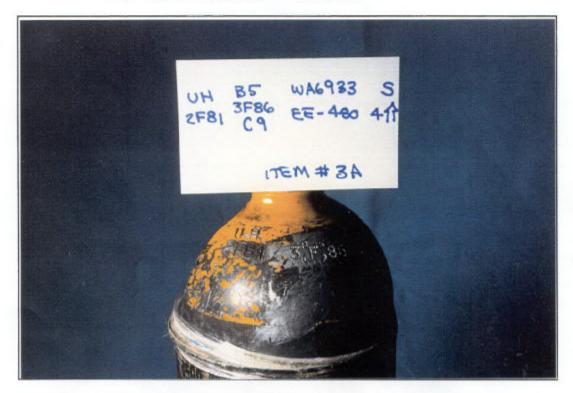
MARKINGS ON THE HEAD OF THE RUPTURED CYLINDER SHOWING THE DATE OF RETESTS -- ITEM 3A
